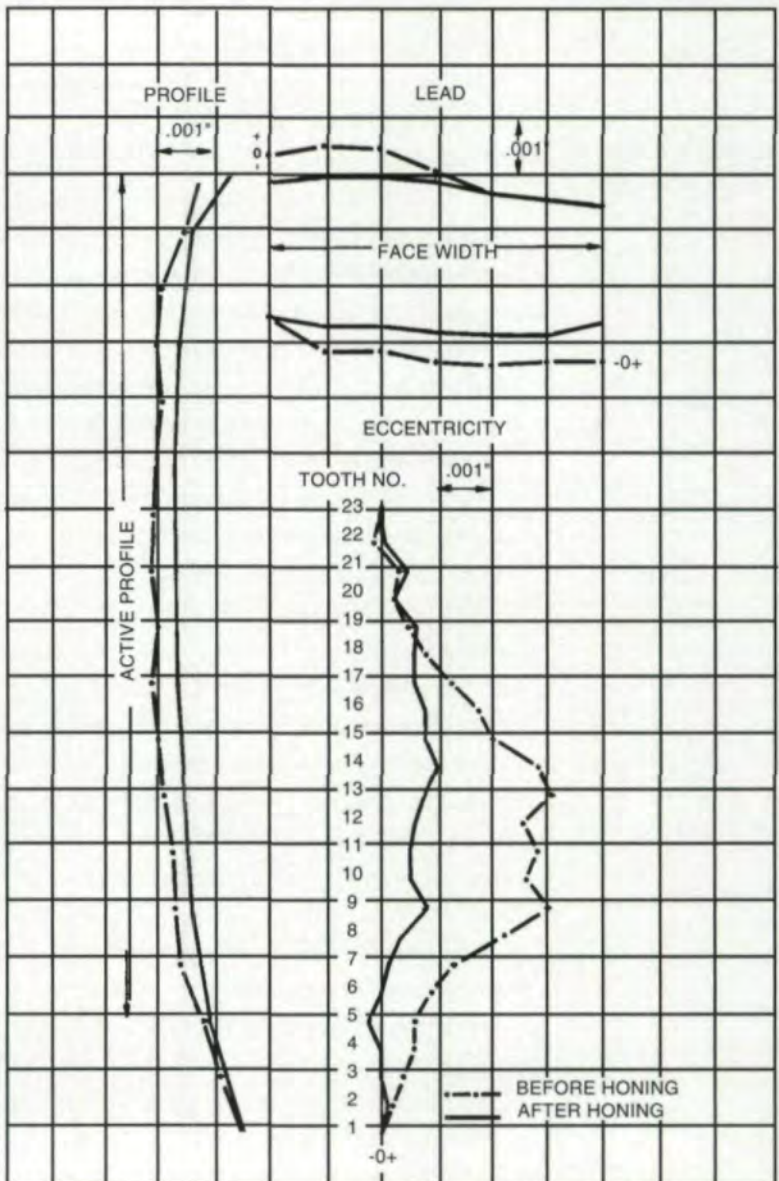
Improvement in tooth accuracy achieved by honing.
